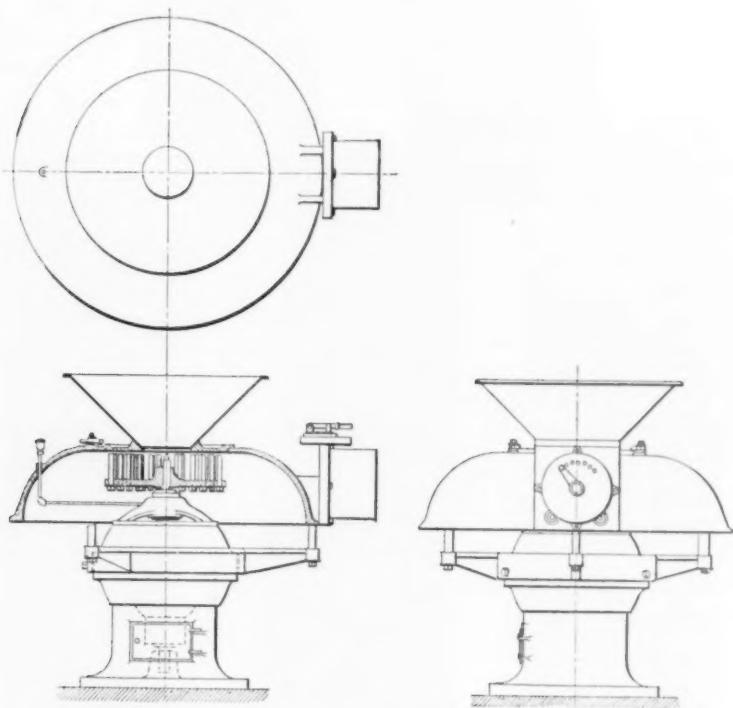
SECTIONAL DRAWING OF CENTRIFUGAL SAND MIXING MACHINE
